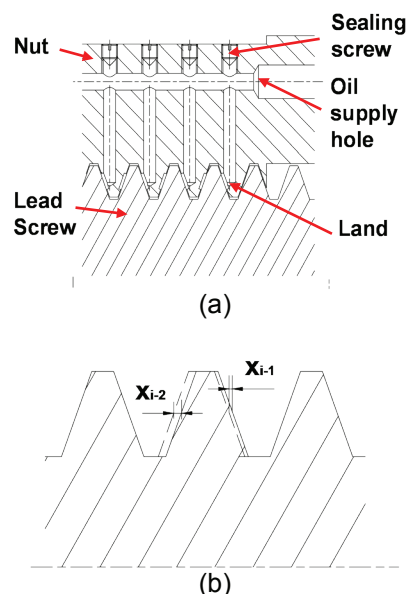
Hydrostatic Lead screw schematic:(a) the structure of the lead screw nut;(b) trapezoidal lead screw thread tooth profile.
